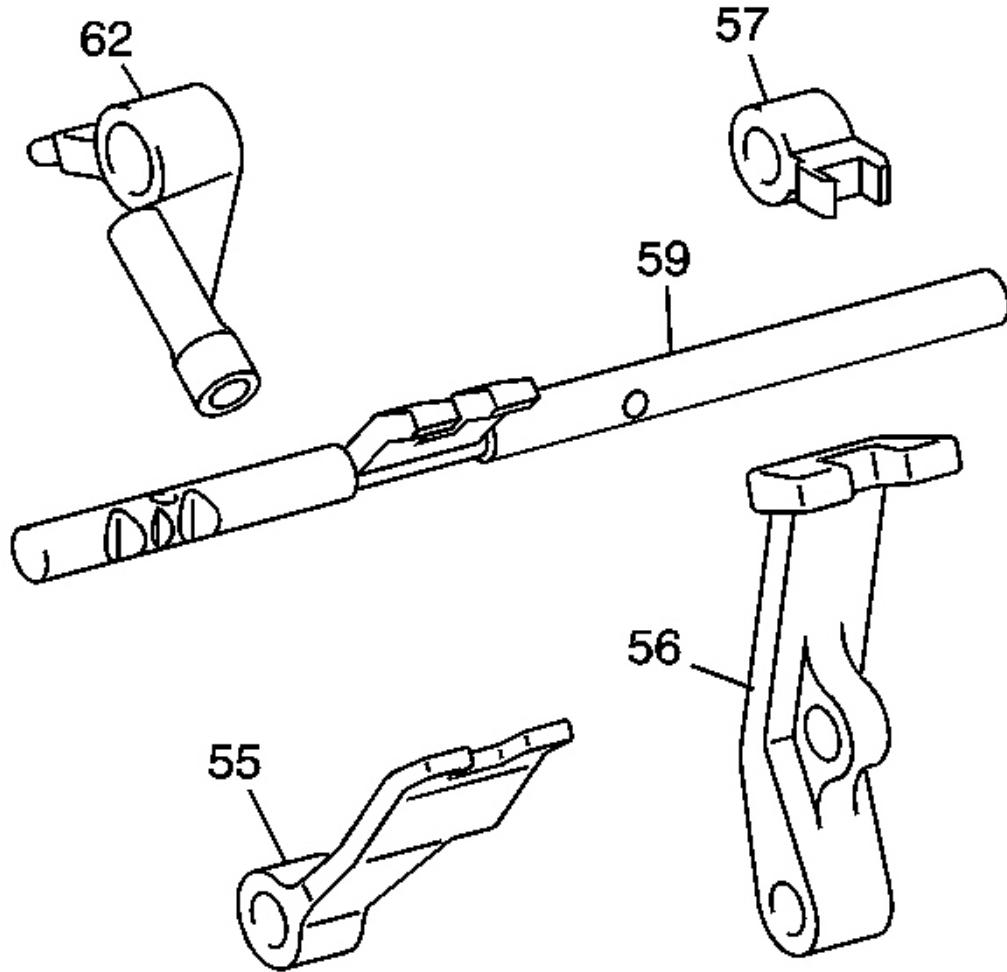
Inspecting Detent Lever, Assembly, Shift Shaft & Control Lever
